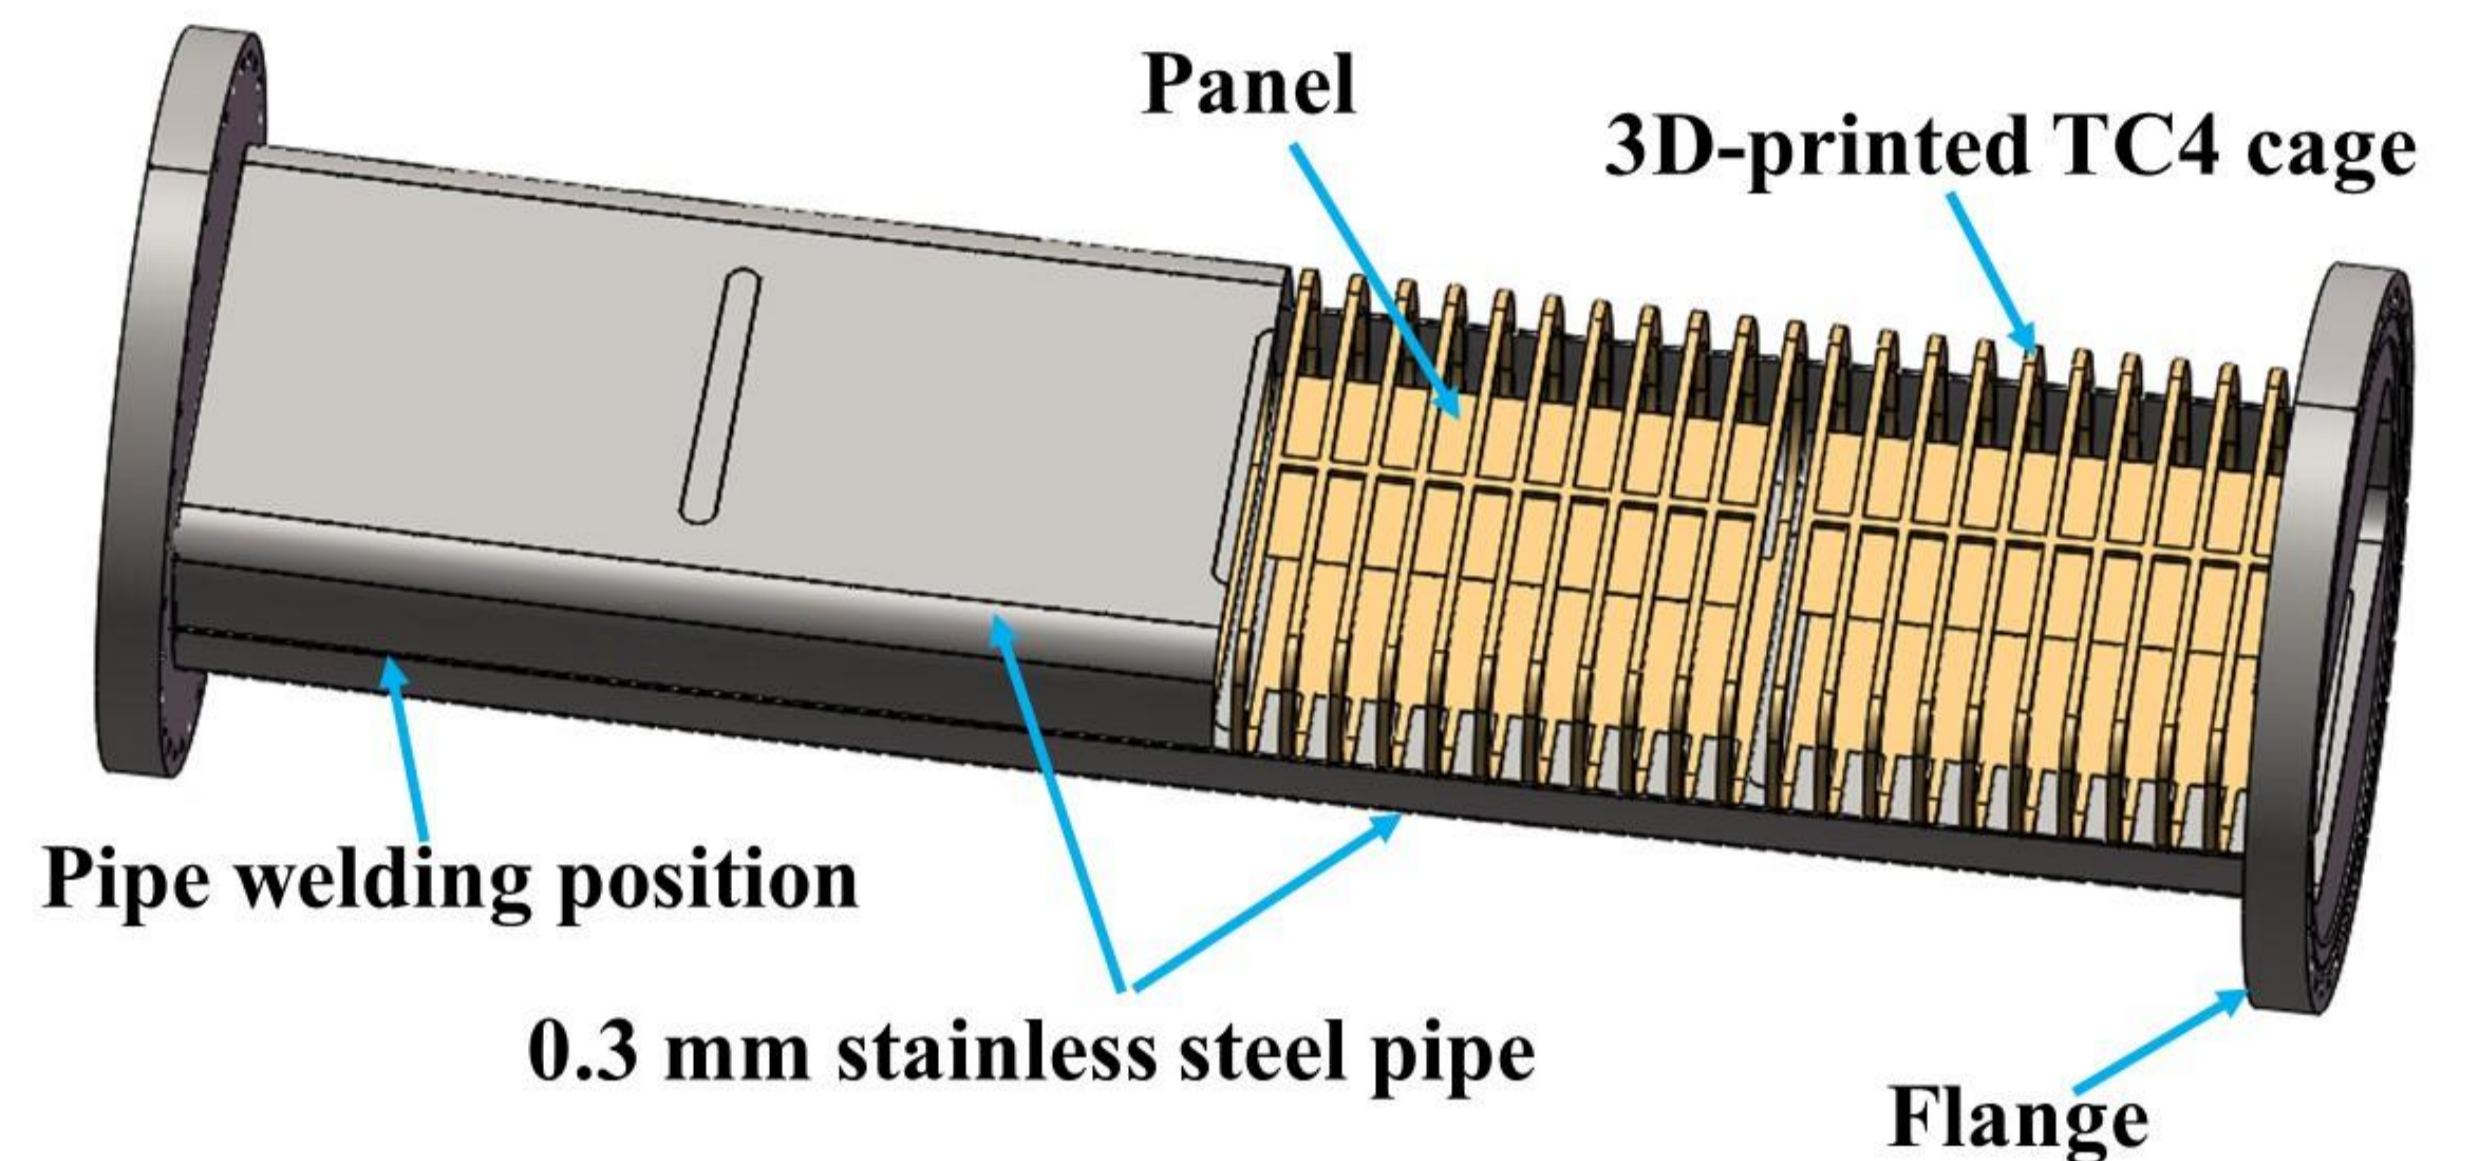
CAD drawing of the 3D-printed TC4 cage inside 0.3mm vacuum chamber
